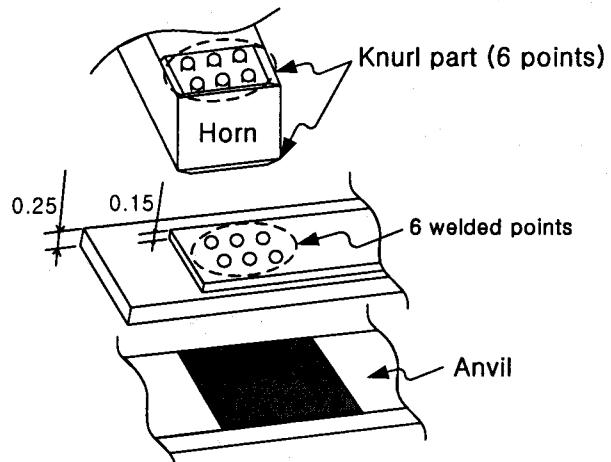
Schematic for specimens(Al) and ultrasonic welding equipment
